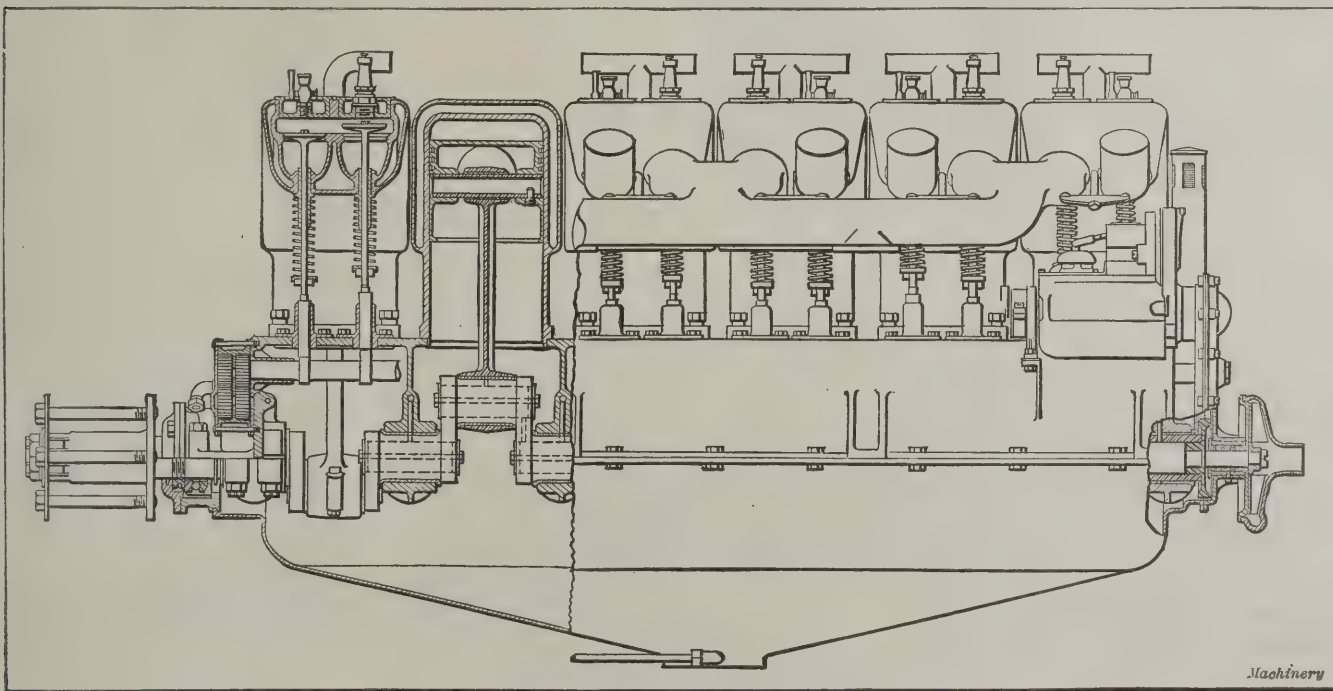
Construction of Sturtevant Motor, Six-cylinder
